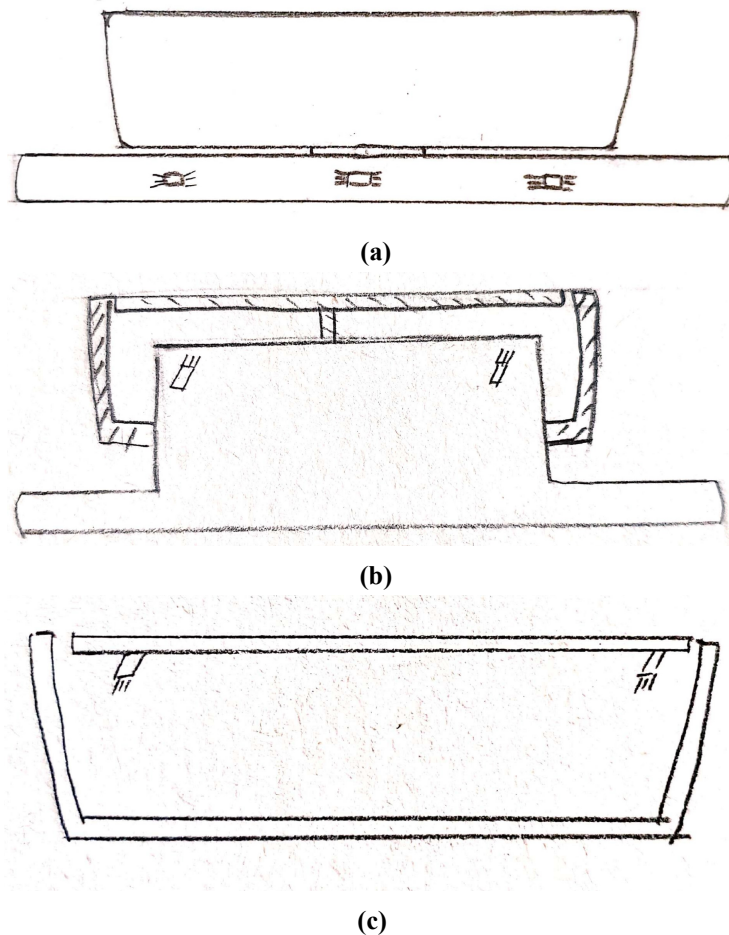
a) Sealed sensor placement. b) Sealed sensor placement but the sensors are elevated. c) PCB is placed under the push top.
